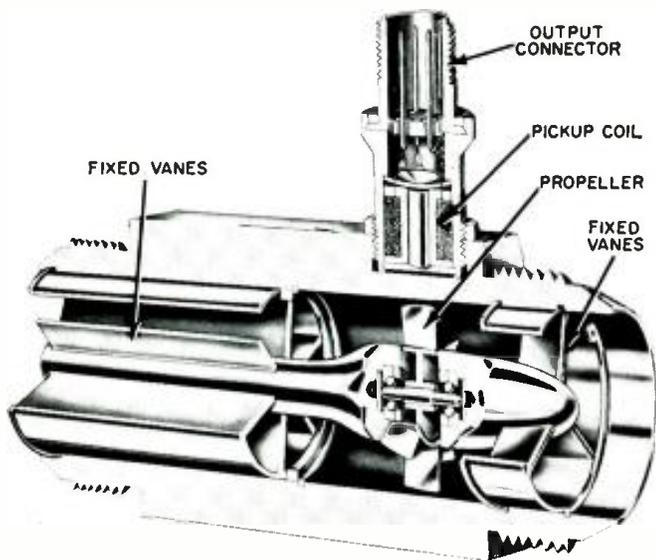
Cutaway drawing of typical small turbine flowmeter.
